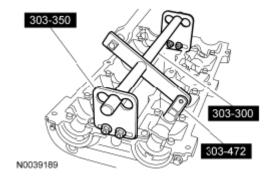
Compressing Valve Spring Courtesy of FORD MOTOR CO.
